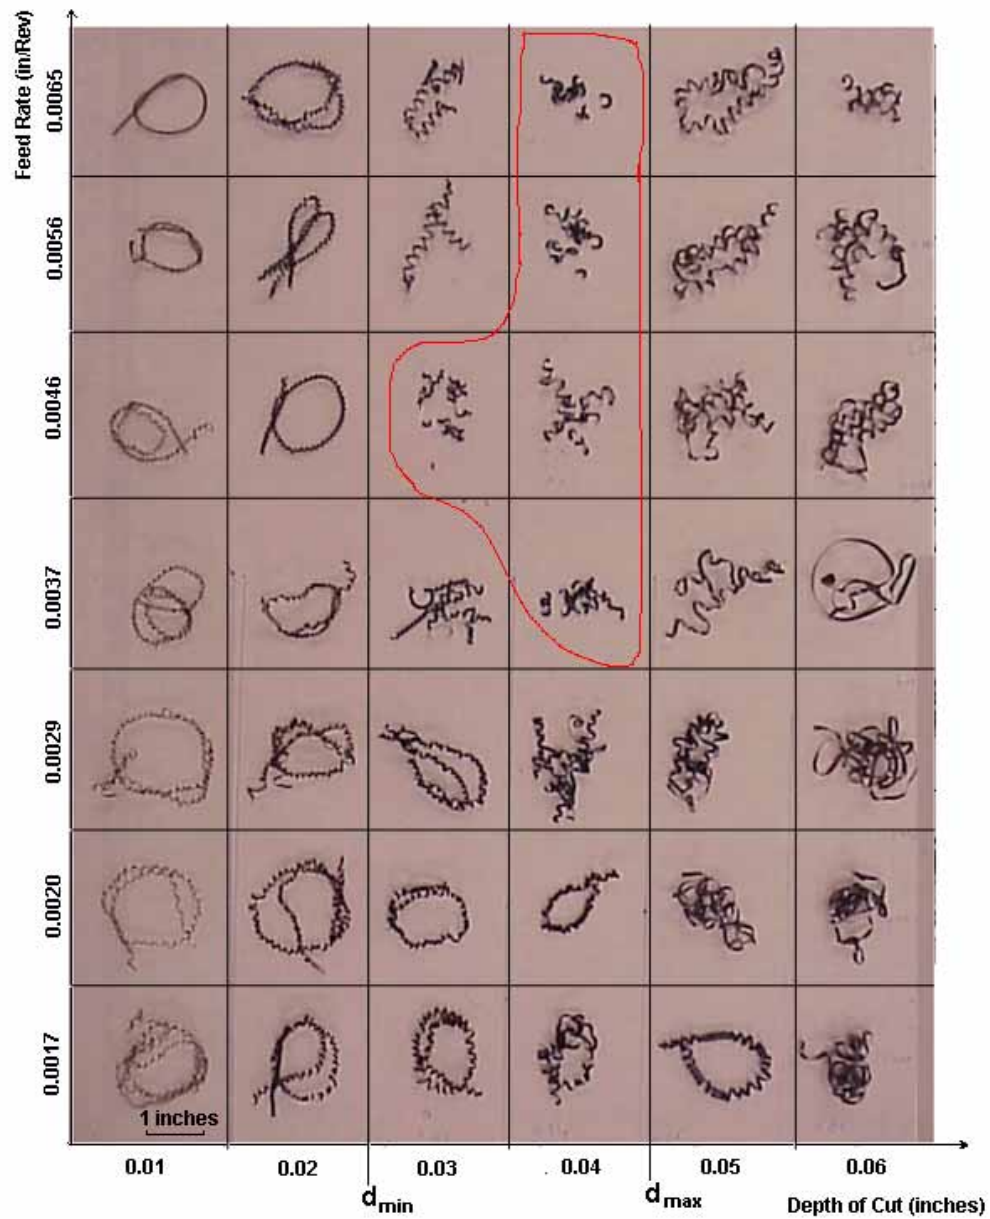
TNMG QF 333 4025 Insert Chip-Breaking Chart
